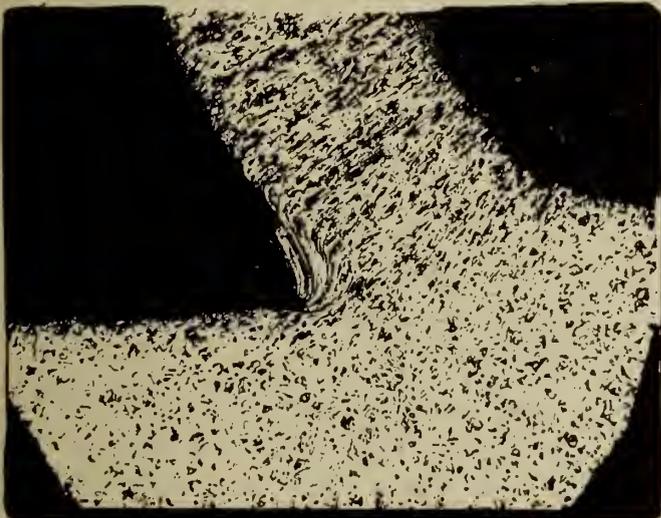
Photomicrograph of chip and work-piece at the tool edge showing the line of demarcation between chip and work-piece and also the built-up nose formation.
